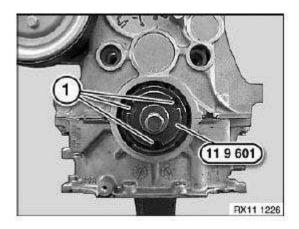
Crankshaft Screws And Special Tool (11 9 601) Courtesy of BMW OF NORTH AMERICA, INC.
